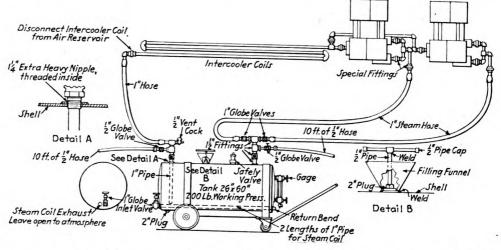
illustrates a simple arrangement of portable equipment required for the system employing solid-flow circulation. Such equipment is easily assembled in any railroad shop. The engineering details, however, as to connections, sizes of piping, etc., will be most effective if checked by a cleaning service man familiar with that work. In any event, it is essential to supply a tank with a safety valve, hoses, and connections, all designed for high pressure. The material, as well as the equipment, should be carefully selected not only so that it will remove the heavy oils but so that it will be safe for the men to handle, avoiding the danger to eyes and skin
